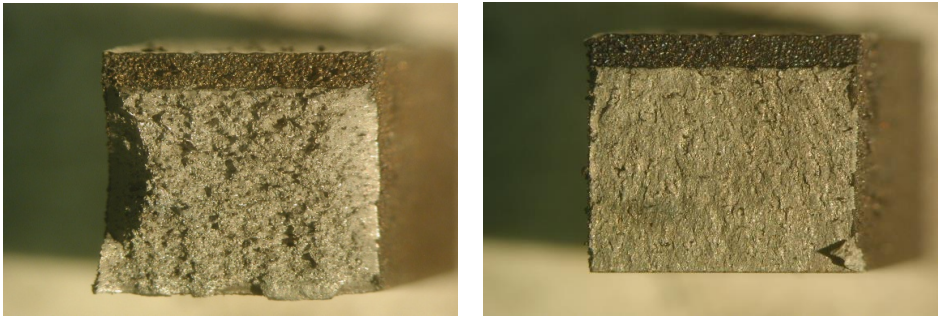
Fracture surfaces of Charpy samples: as-built (left) and after heat treatment (right).
